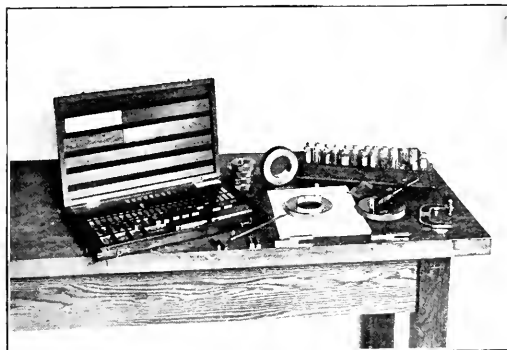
THREE-BALL METHOD OF MEASURING EFFECTIVE DIAMETER OF A RING THREAD GAGE
